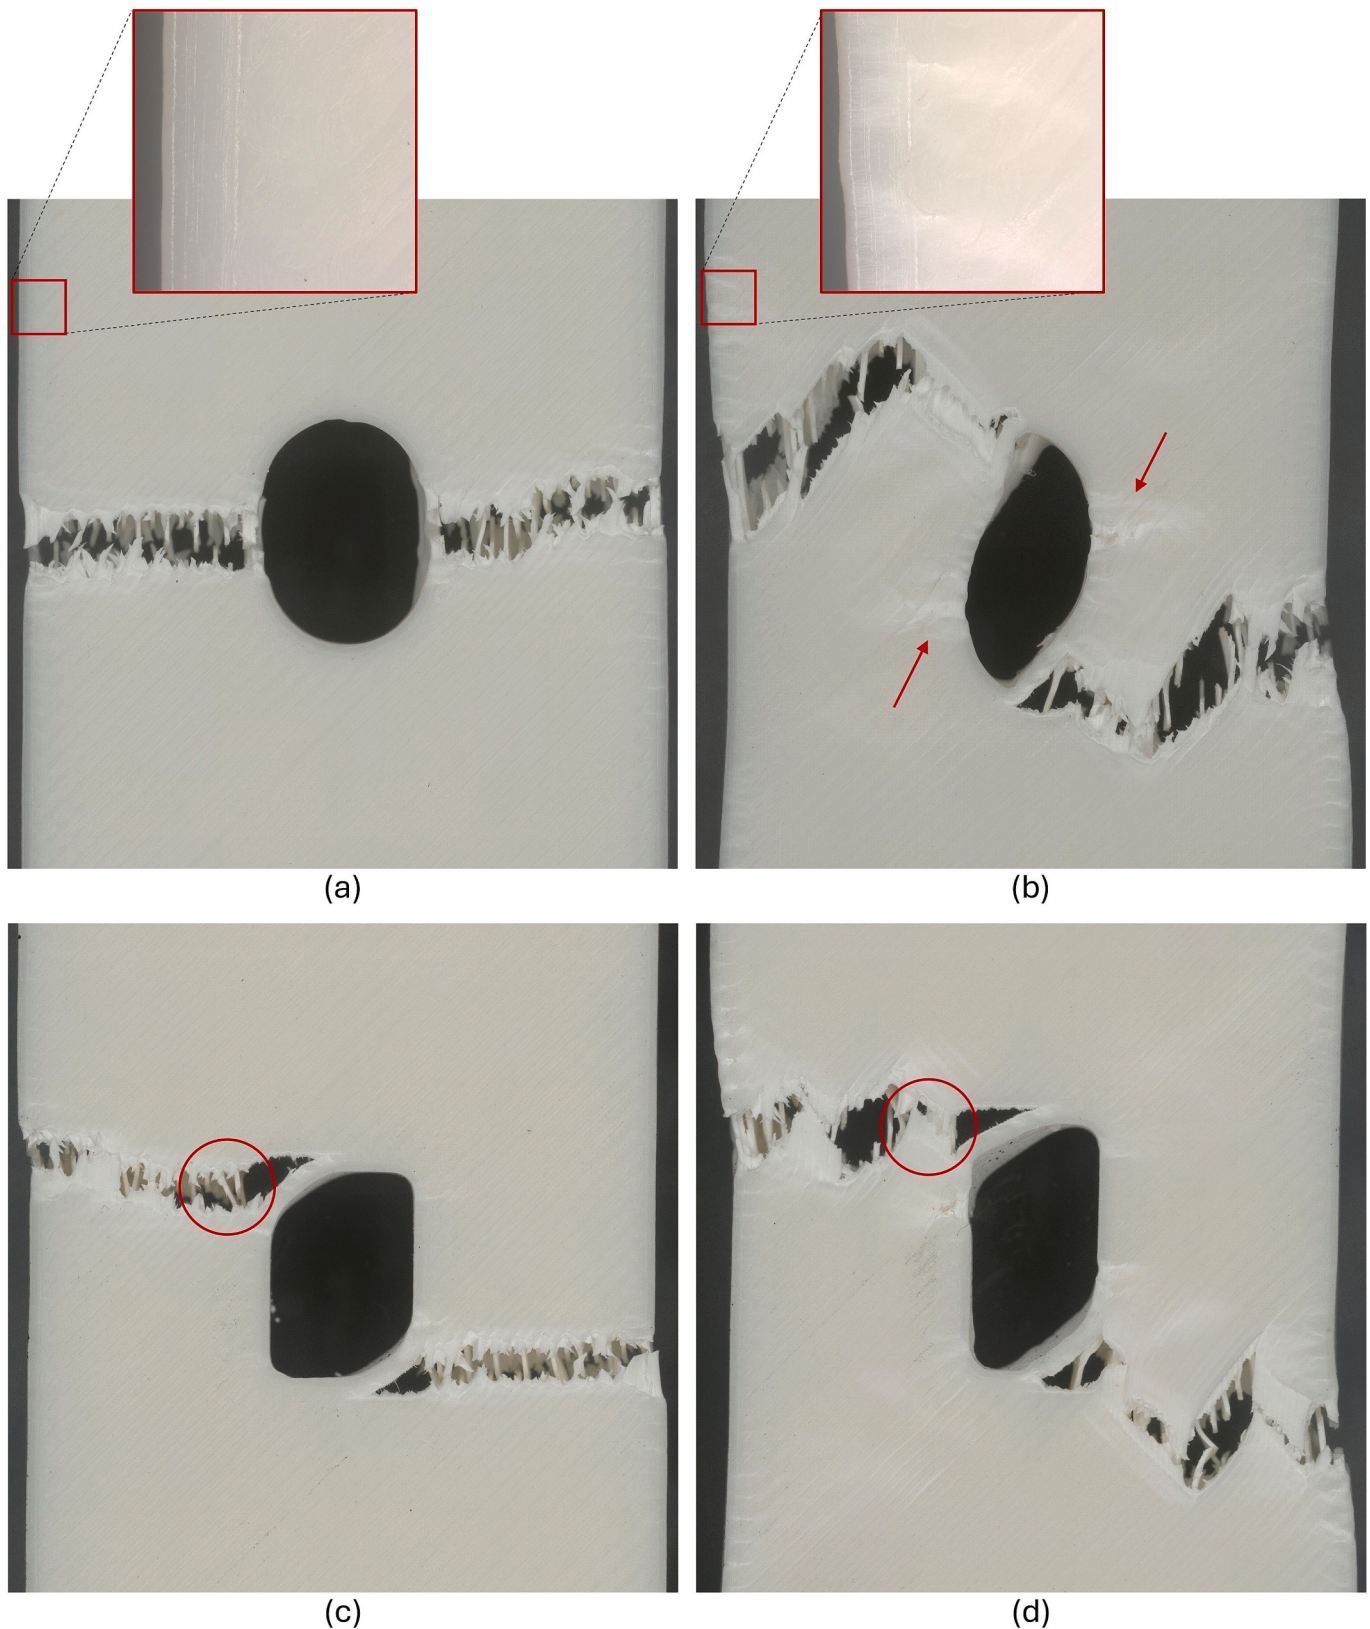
Optical microscopy analysis of the fracture surfaces of the specimens: (a) P1, (b) A5, (c) C2, and (d) C1.
